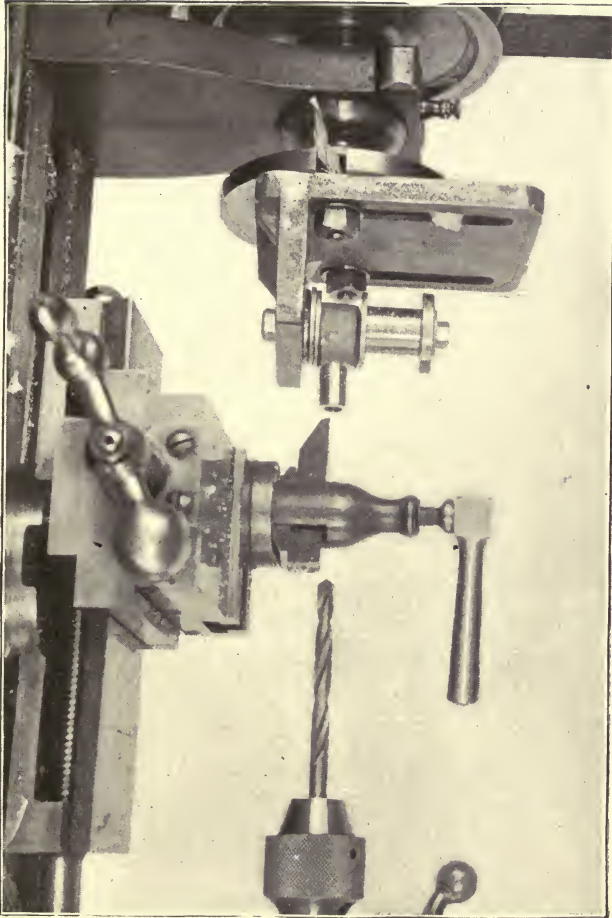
DRILLING AND FINISHING STEM OF GAS RING.
